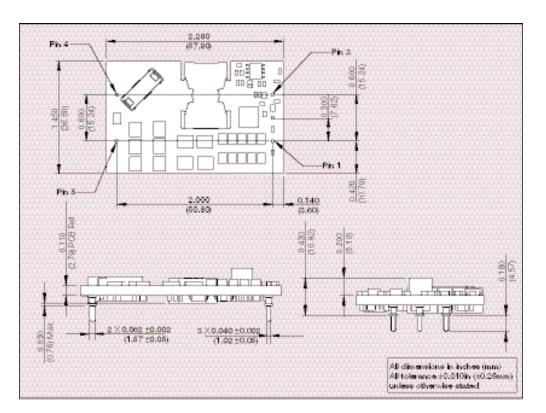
Horizontal Mechanical Drawing and Pinout Table
